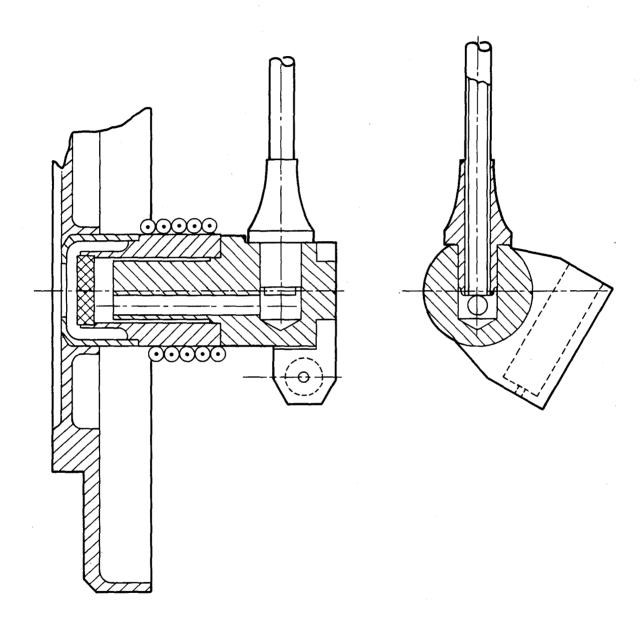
Cathode vaporizer assembly - J-series thruster design.
